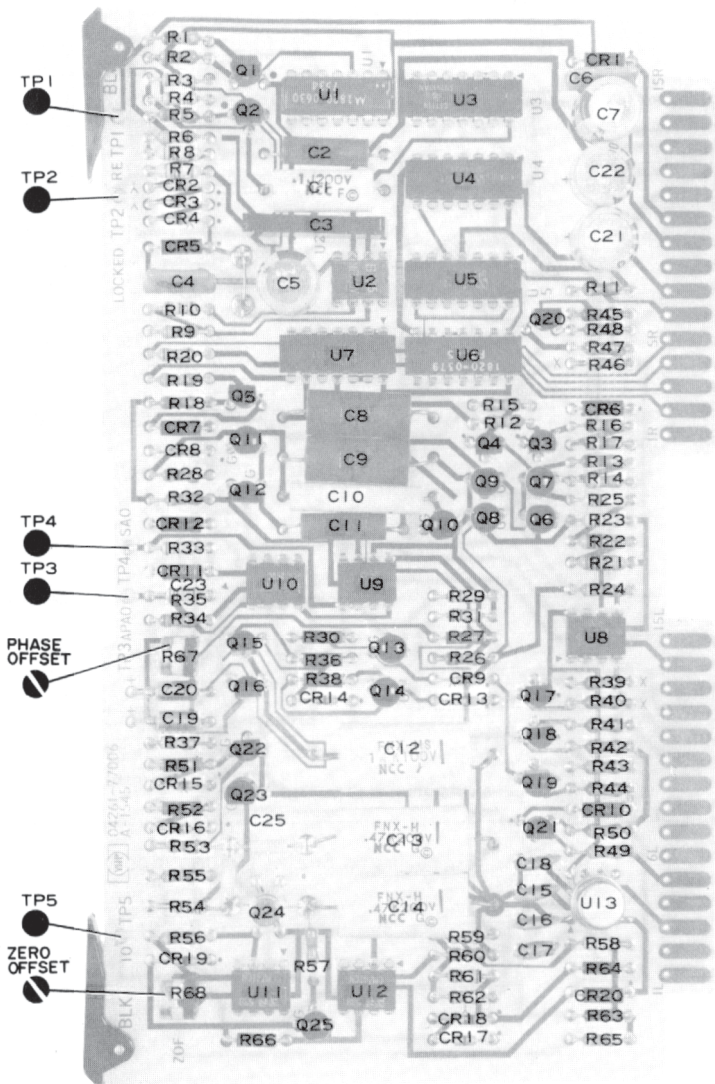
A6 Phase Detector/Integrator Board Assembly Component Locations.
